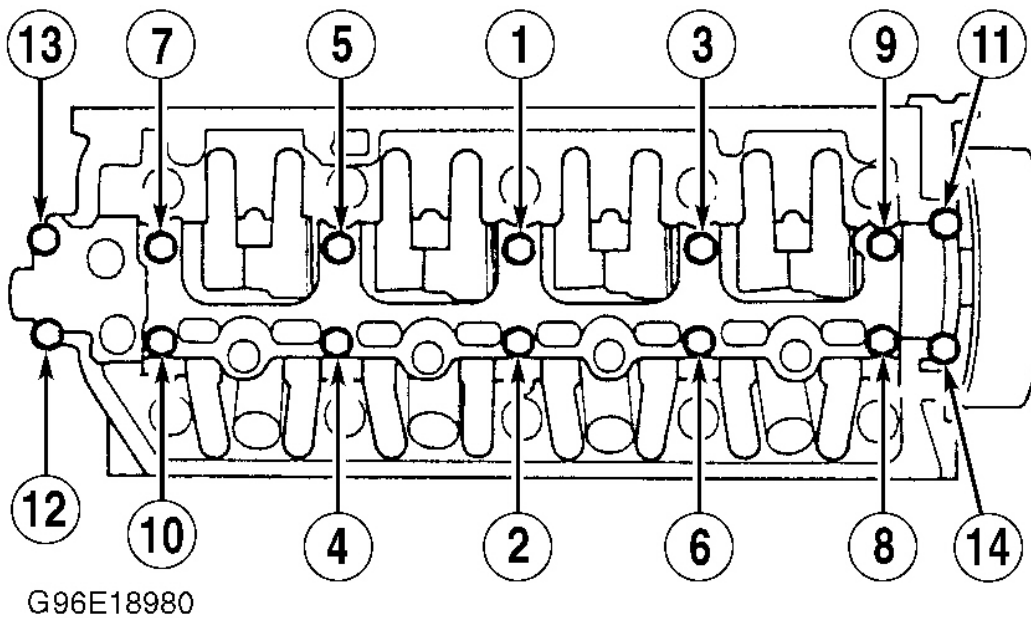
Camshaft Holder Plate Bolt Tightening Sequence (SOHC)
